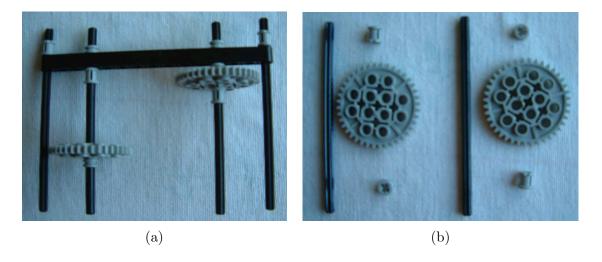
Module 2: (a) the submodule 2-1 assembly; and (b) the Lego pieces used for the two gear shafts
